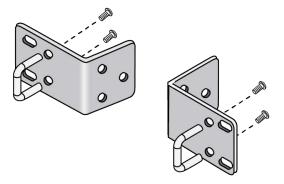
Attaching the Handles to the RKMT-J13 Brackets
